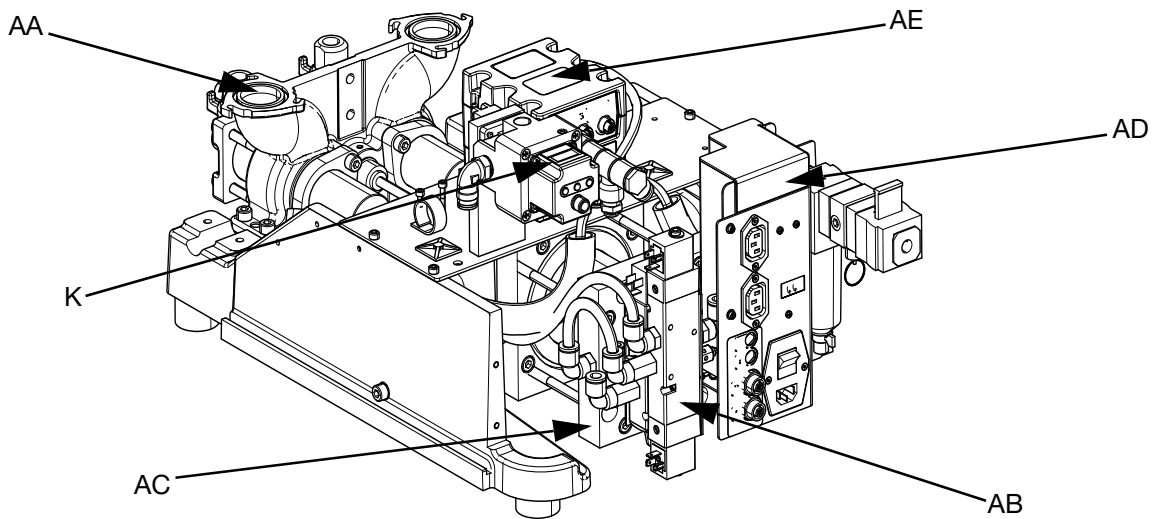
PR70f Rear View with Shield, Tanks, Dispense Valve, and ADM Removed
